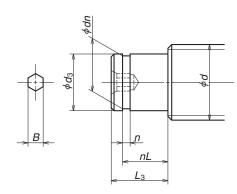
Shaft end configuration of R model (opposite the drive side)
